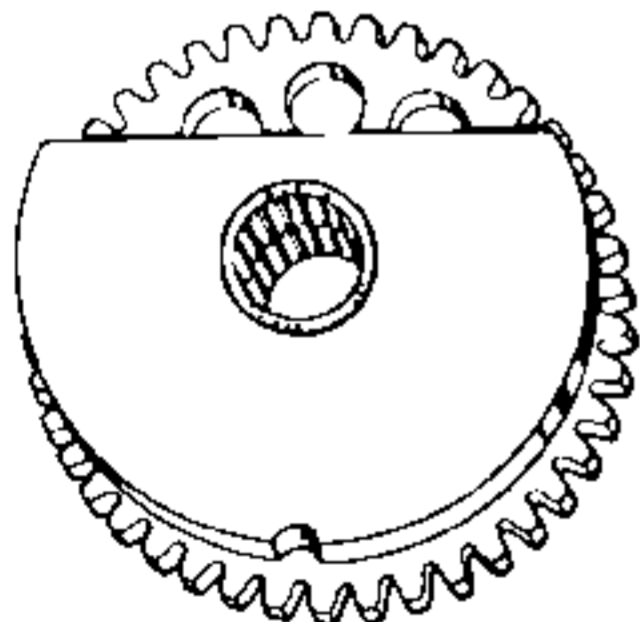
On Models HH80, HH100 and HH120, needle bearings are installed flush to 0.015 inch (0.381 mm) below edge of bore. Note tool alignment notch at lower side of balancer.
